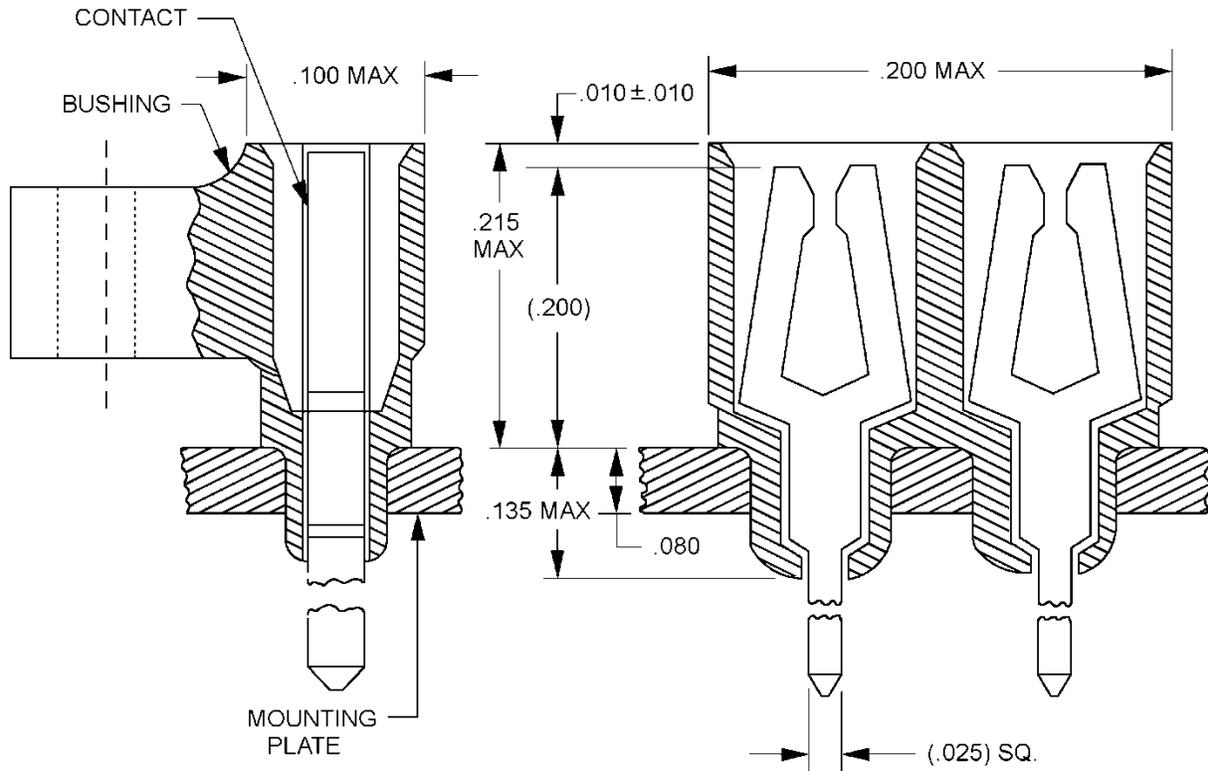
Typical female contact, polarizing bushing and mounting plate assembly.
